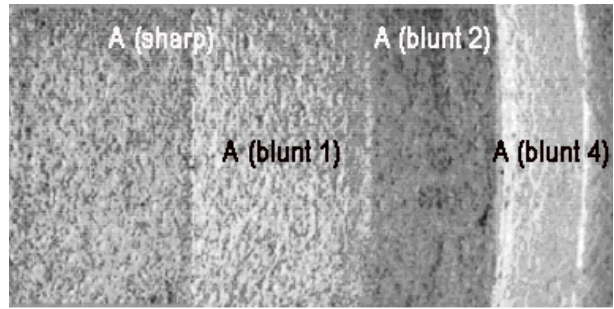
Surface of a marble blank after processing with a sharp tool, tool with off-taken edges and blunt tool.
